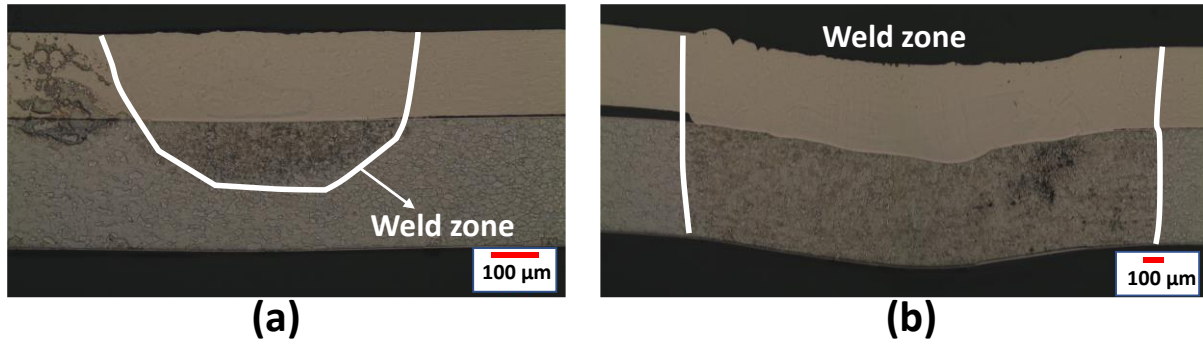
Cross-sectional view of the weld nugget (a) for the minimum load (experiment no. 1) and (b) maximum load (experiment no. 36)
